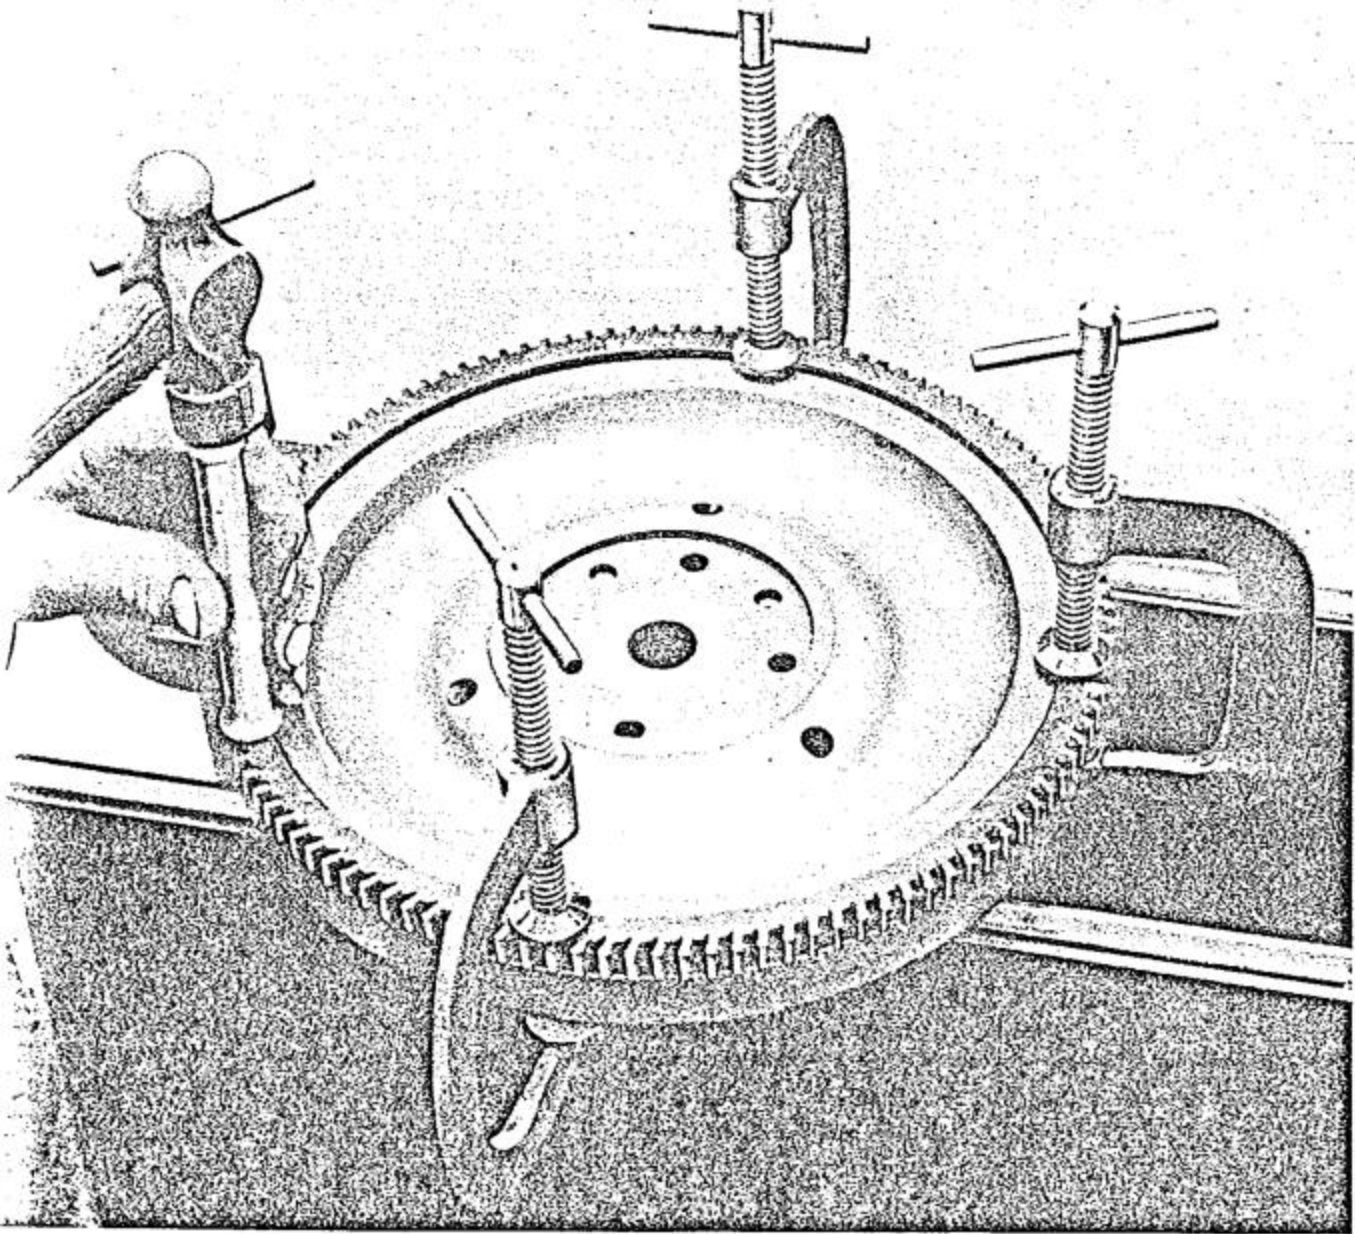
Indicates the use of "G" Clamps when fitting new starter ring
